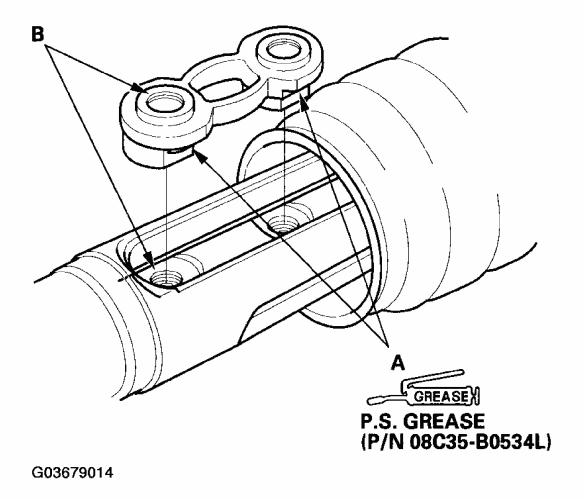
Placing Slider Guide On Steering Rack By Aligning Bolt Holes Courtesy of AMERICAN HONDA MOTOR CO., INC.
